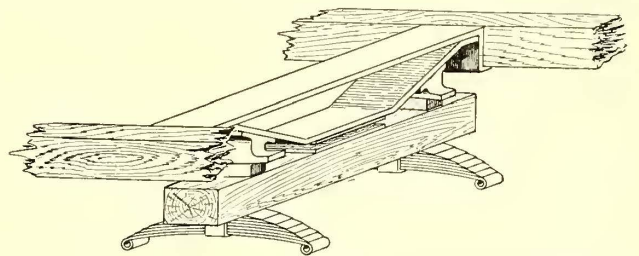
LONGITUDINAL ARRANGEMENT OF BOLSTER SPRINGS
